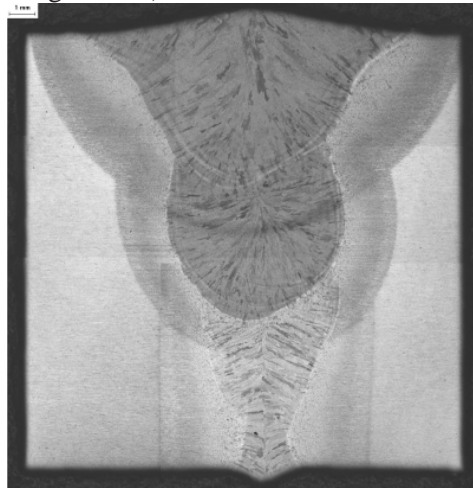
Macrosection of welds on X100 pipes 16.4 mm thick
